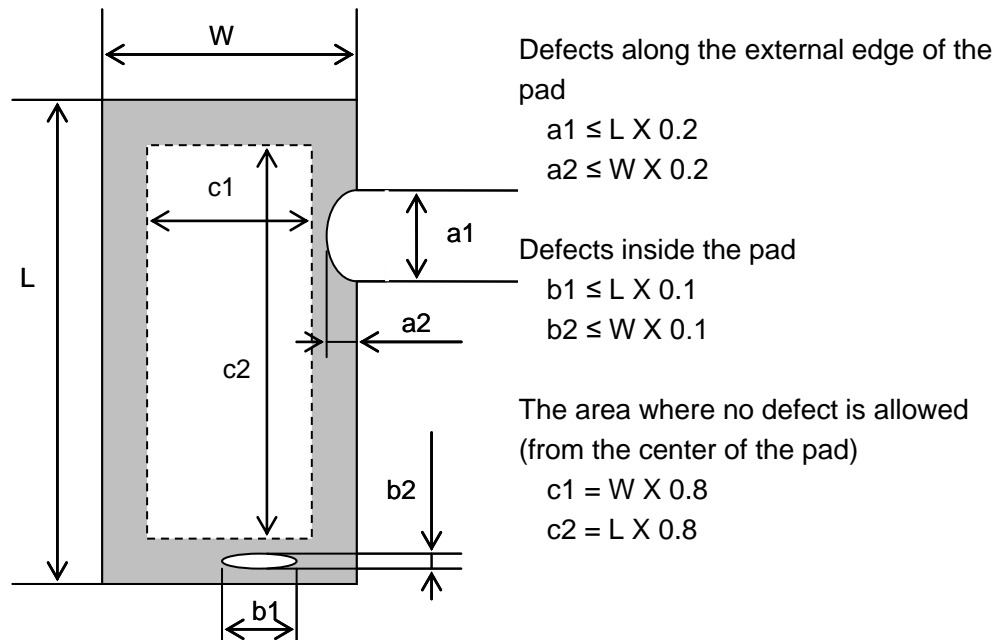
Passing Criteria for Defects on the Rectangular Surface Mount Pad
